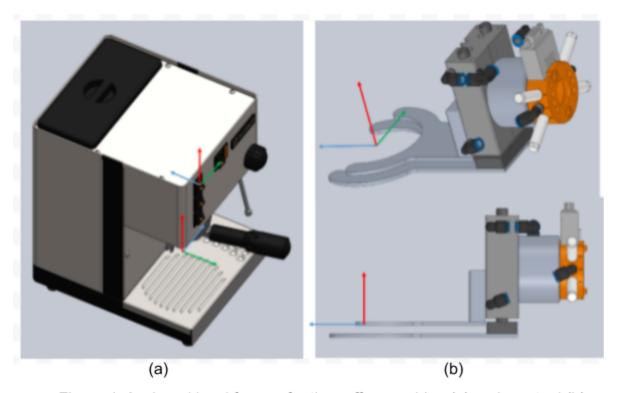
Assigned local frames for the coffee machine (a) and cup tool (b)
